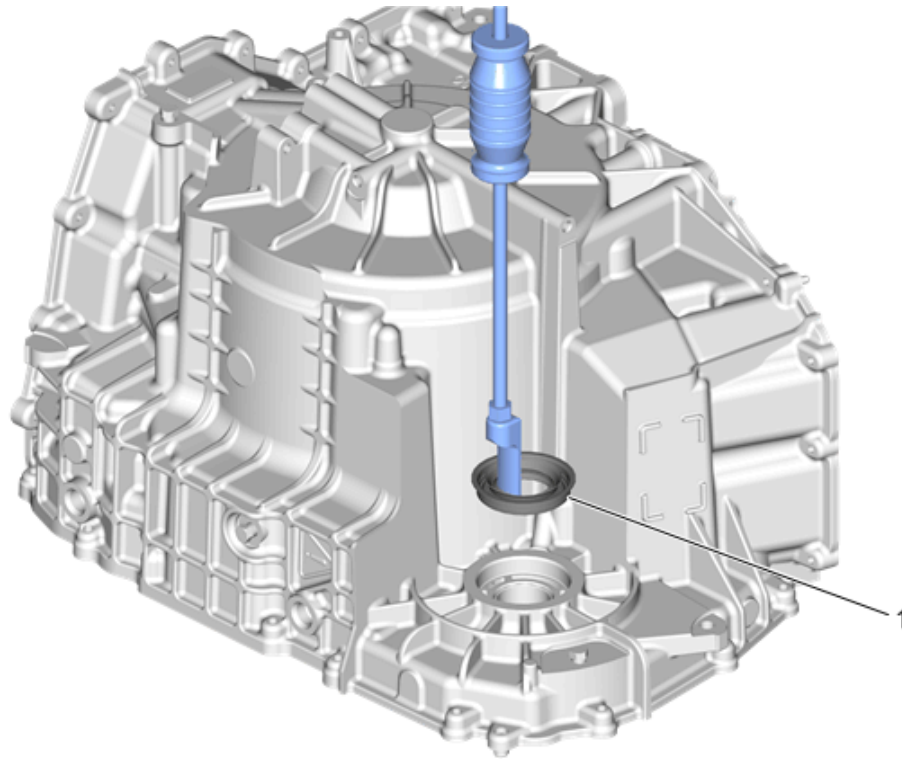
Front Wheel Drive Shaft Oil Seal - Left Side
